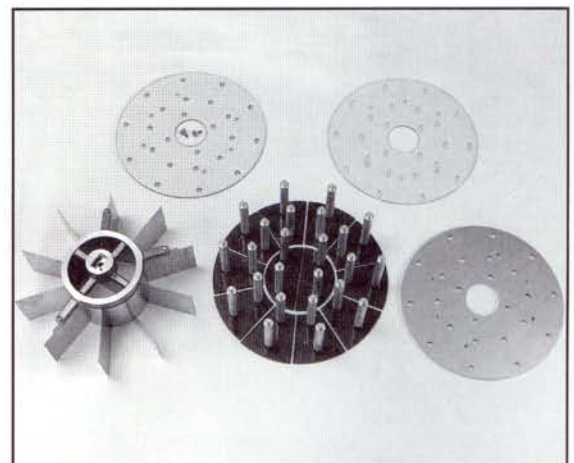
Divider Blade Assembly may now be removed, but need not be disassembled further.
